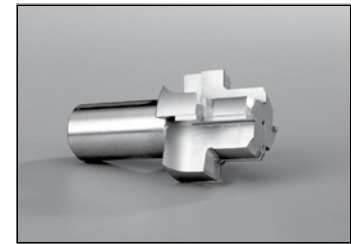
BSPP Straight Thread Port Counterboring Tool
